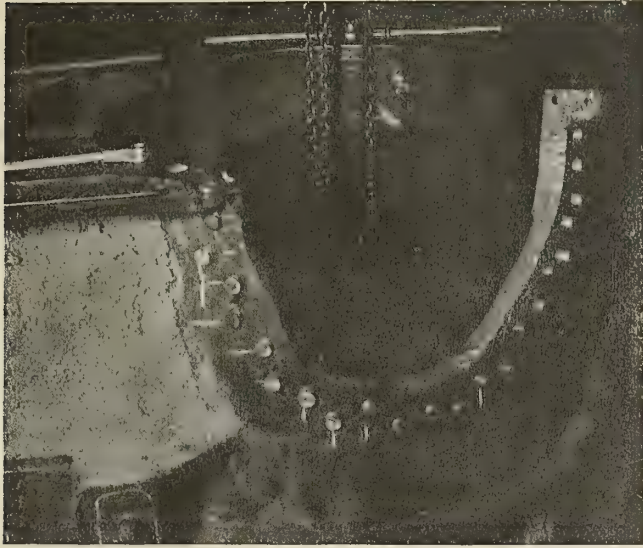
Prinzess Irene*, Damaged High-Pressure Cylinder, Ready for Insert, Preparatory to Welding
